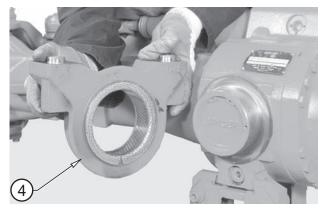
Remove the swinging support (4) on the side opposite the drive.
